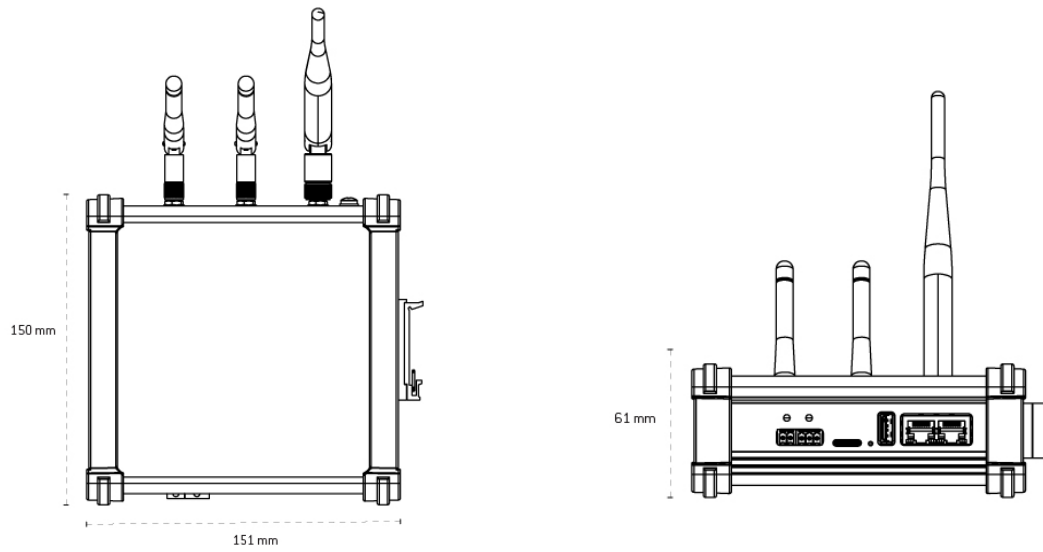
Dimensions of the Universal IoT Gateway with aluminum case.
